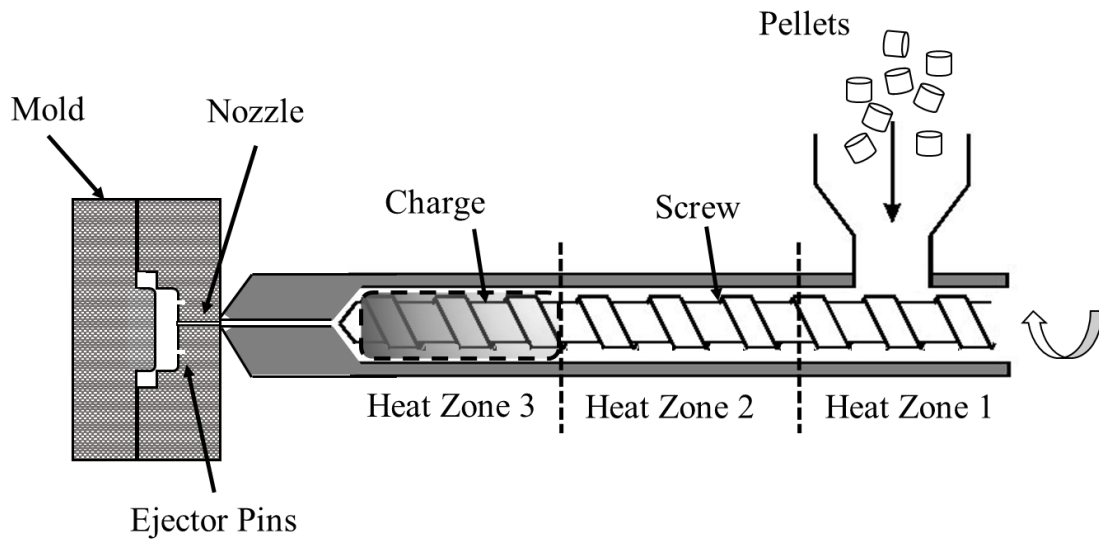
Schematic of the IM process. Pellets inserted through feed section are melted along the progress in the screw and injected in the closed mold through nozzle under high pressure.
